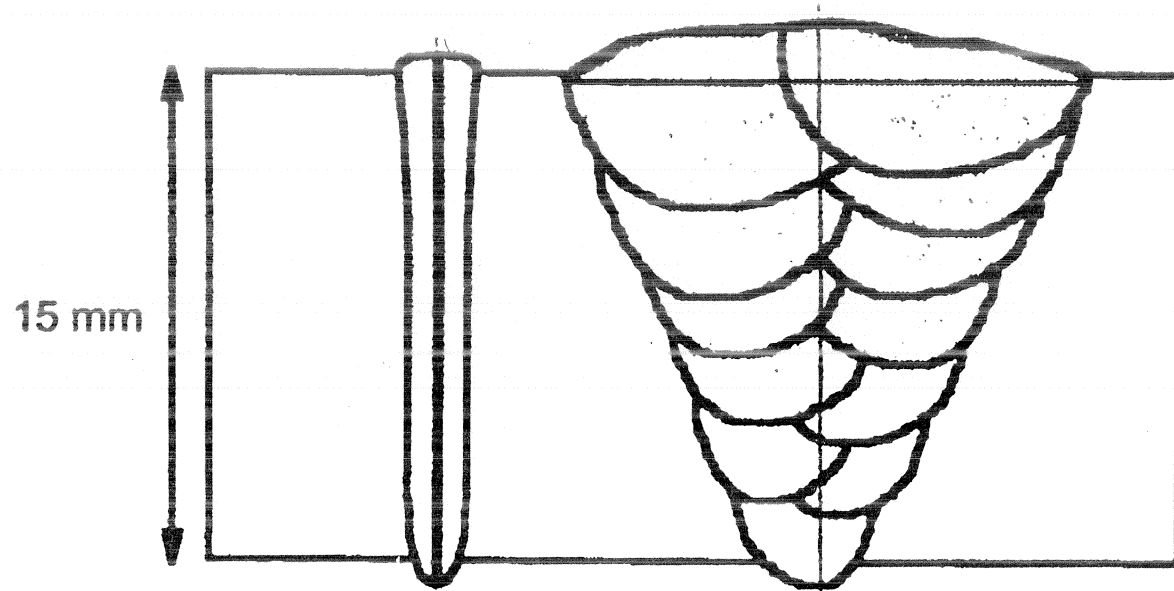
Schematic comparison of laser weld (left) and multipass arc weld (right) in 15 mm thick carbon steel.
